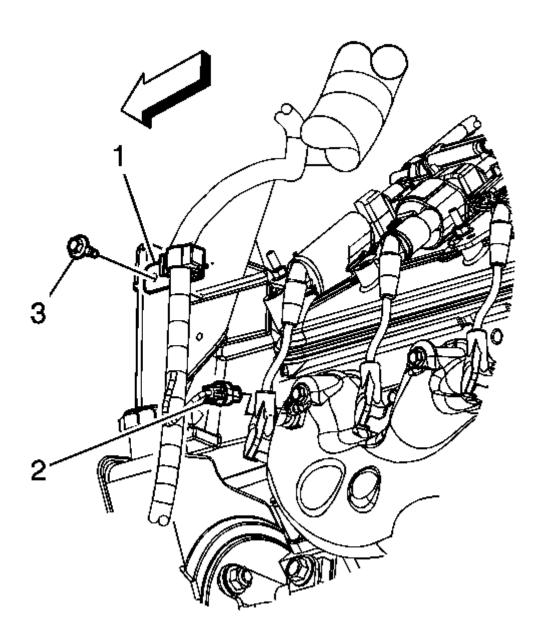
View Of Engine Wiring Harness, Clip, Bolt & Connector Courtesy of GENERAL MOTORS CORP.
